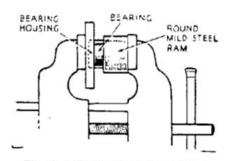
Using a vice and steel ram to press a new bearing into the dynamo end housing.
